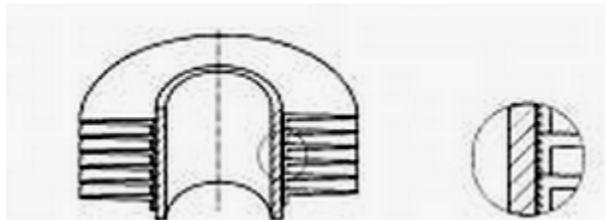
Knurled L with metal strip wounded on the core tube with knurled surface.
